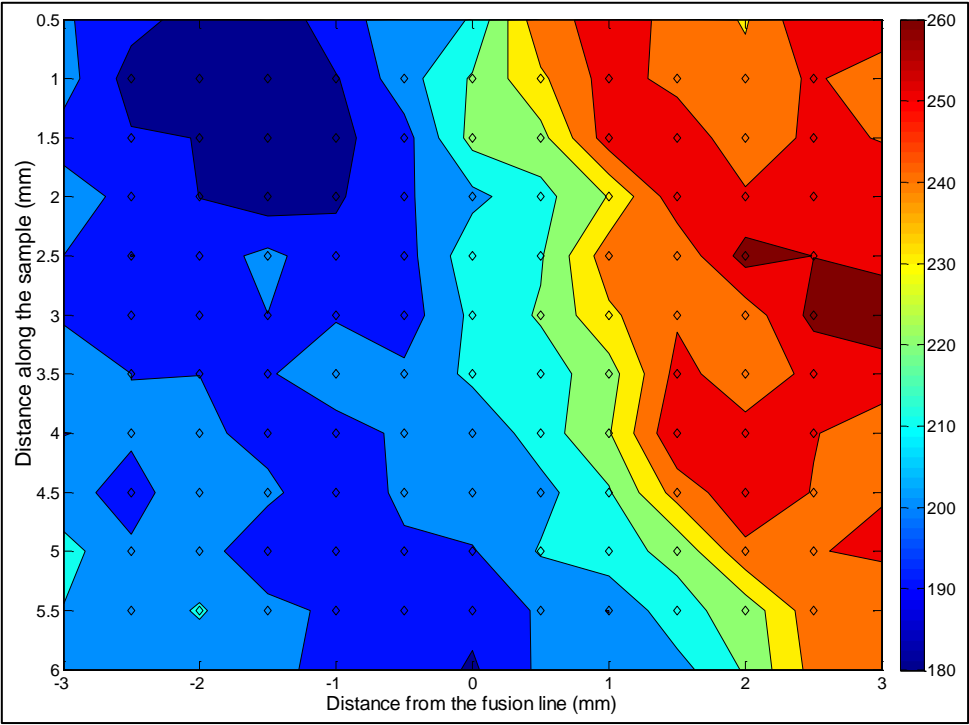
X65 (A) SAW weld 1 hardness map
